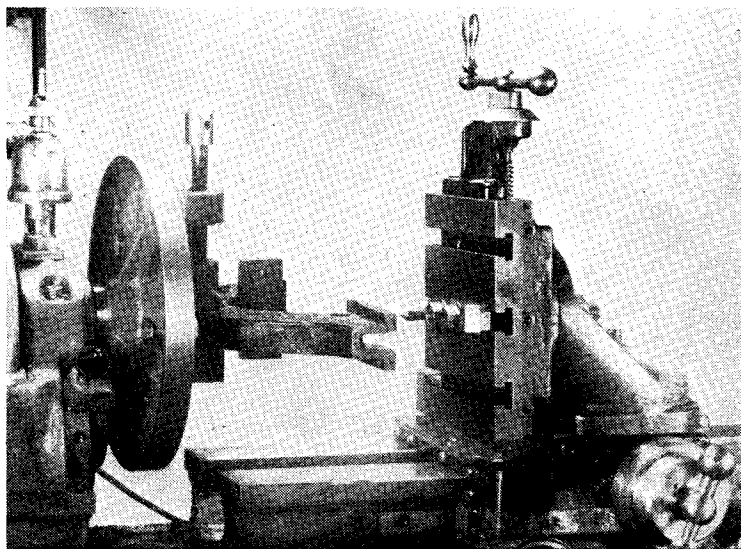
Method of planing the faces of the limb on a $3\frac{1}{2}$ -in. lathe, to ensure accuracy of alignment
